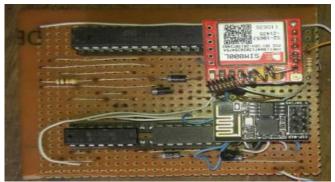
Printer GSM and GPRS Control Unit The construction is carried out using Vero board. First, all the components in each of the sub-circuit unit are carefully tested and mounted, before soldering them to the Vero board. As shown in Figure 4, the red and black components placed side by side are the GPRS and GSM respectively. The Atmega8 IC is mounted directly opposite to the two AND gate ICs, while the other components like resistors,
